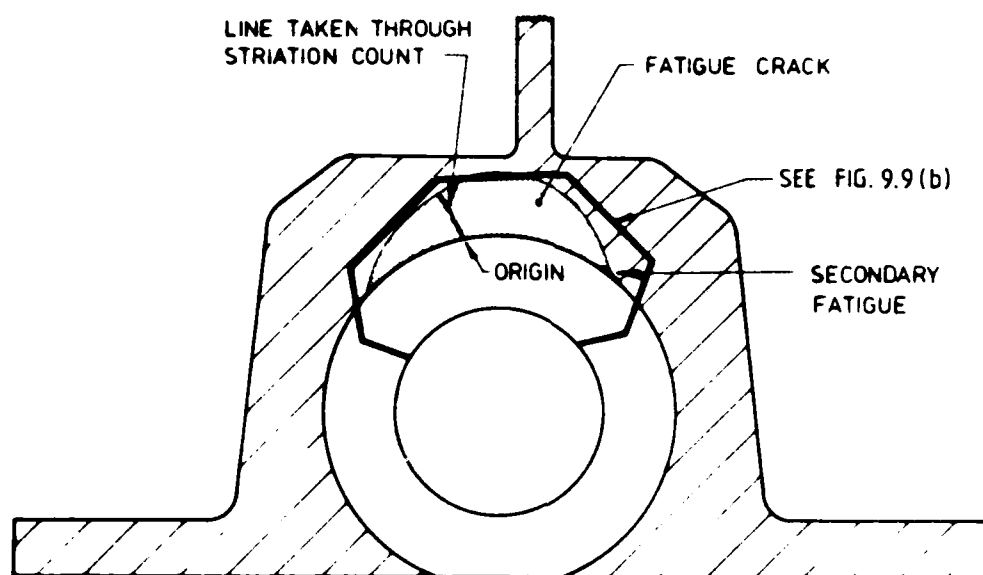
(a) CROSS SECTION OF BEECH BATHTUB FITTING CONTAINING FATIGUE CRACK
